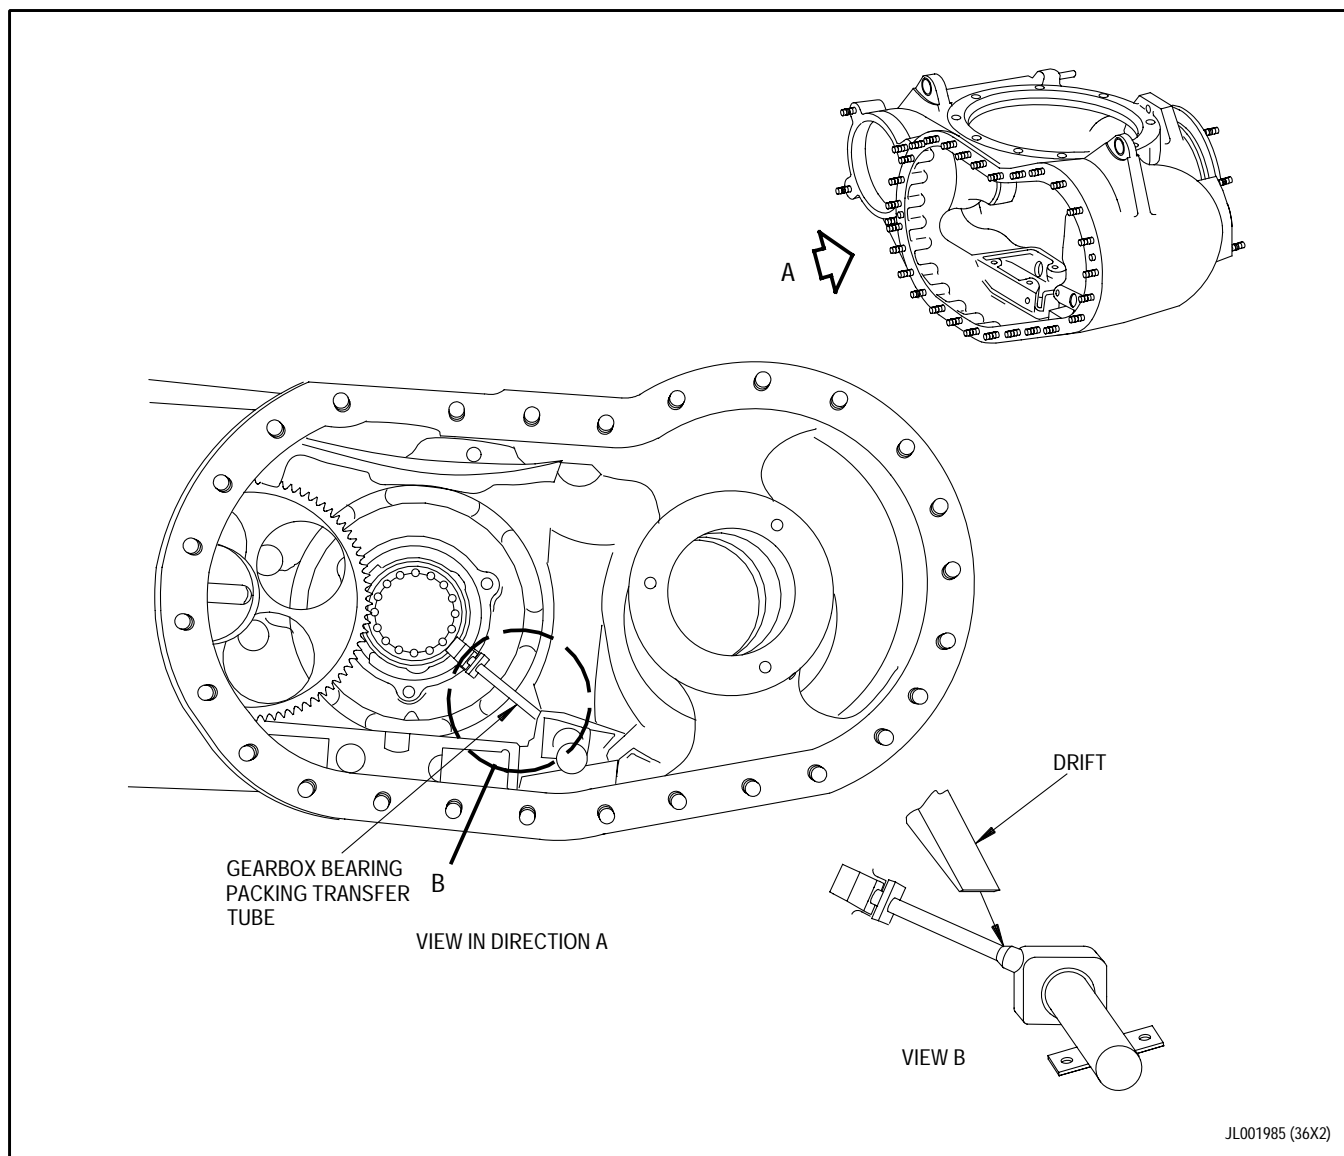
Bearing Assembly and Gearbox Bearing Packing Transfer Tube - Removal
